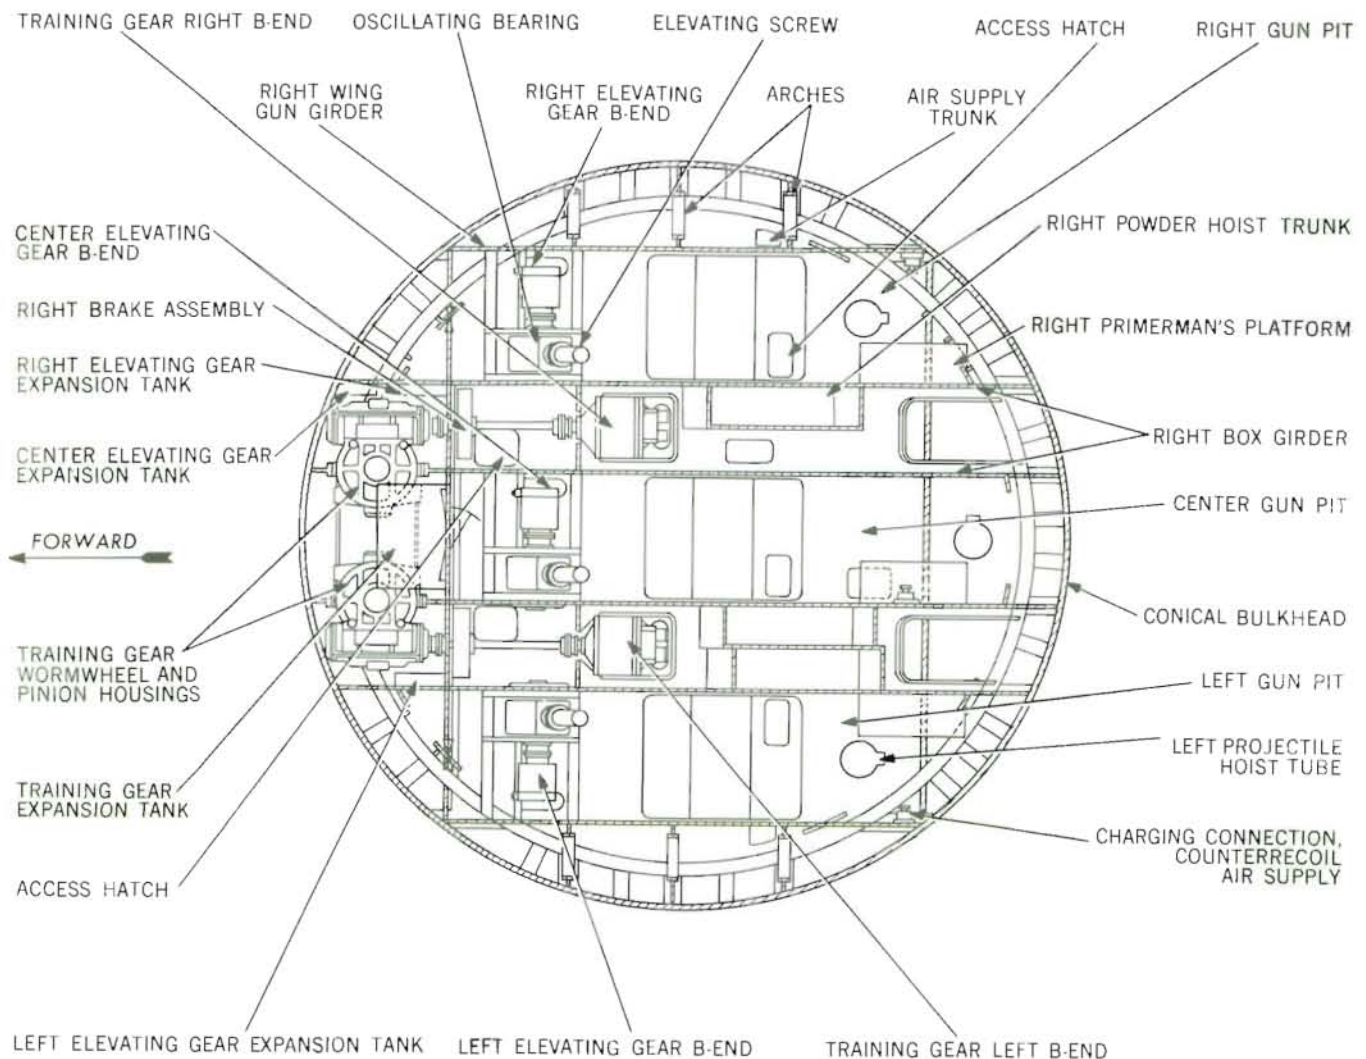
Ordnance Equipment on Pan Floor - General Arrangement - Plan View
